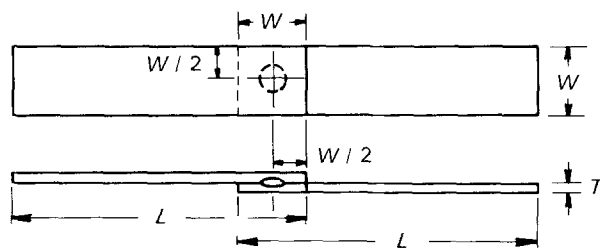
The shape and dimensions of the tensile-shear test piece. $W = 30$ mm, $L = 100$ mm, and $T = 1.0$ mm.
